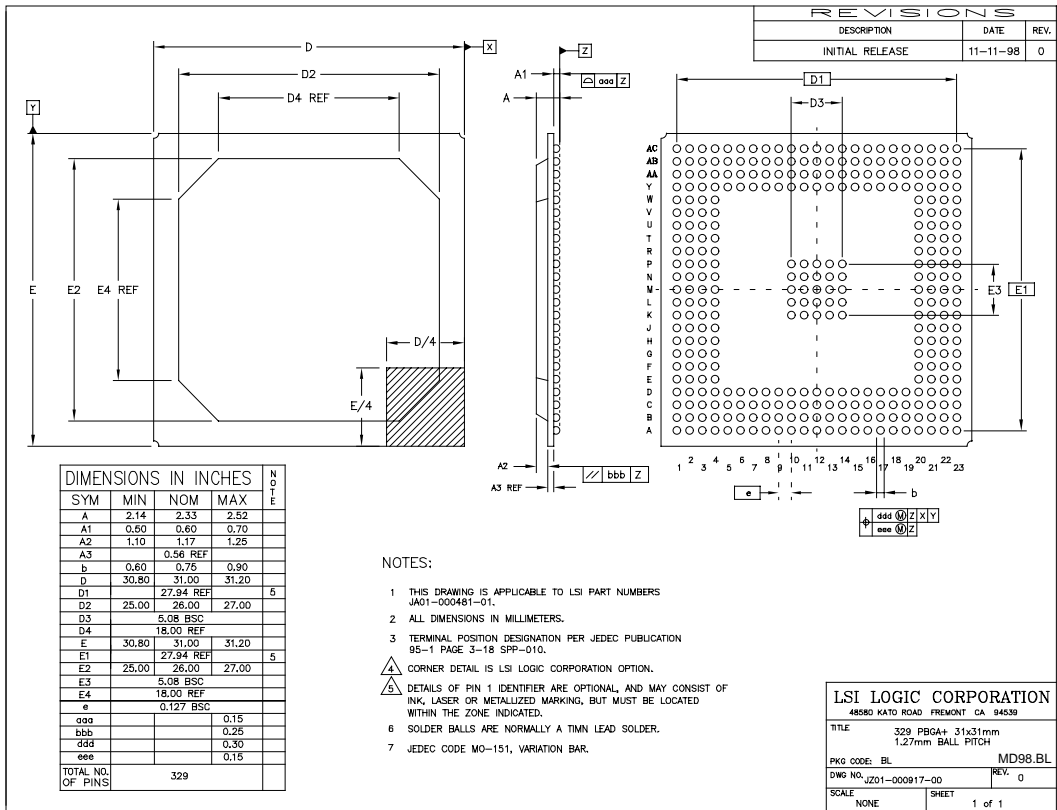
SYM53C896 329 BGA Mechanical Drawing
